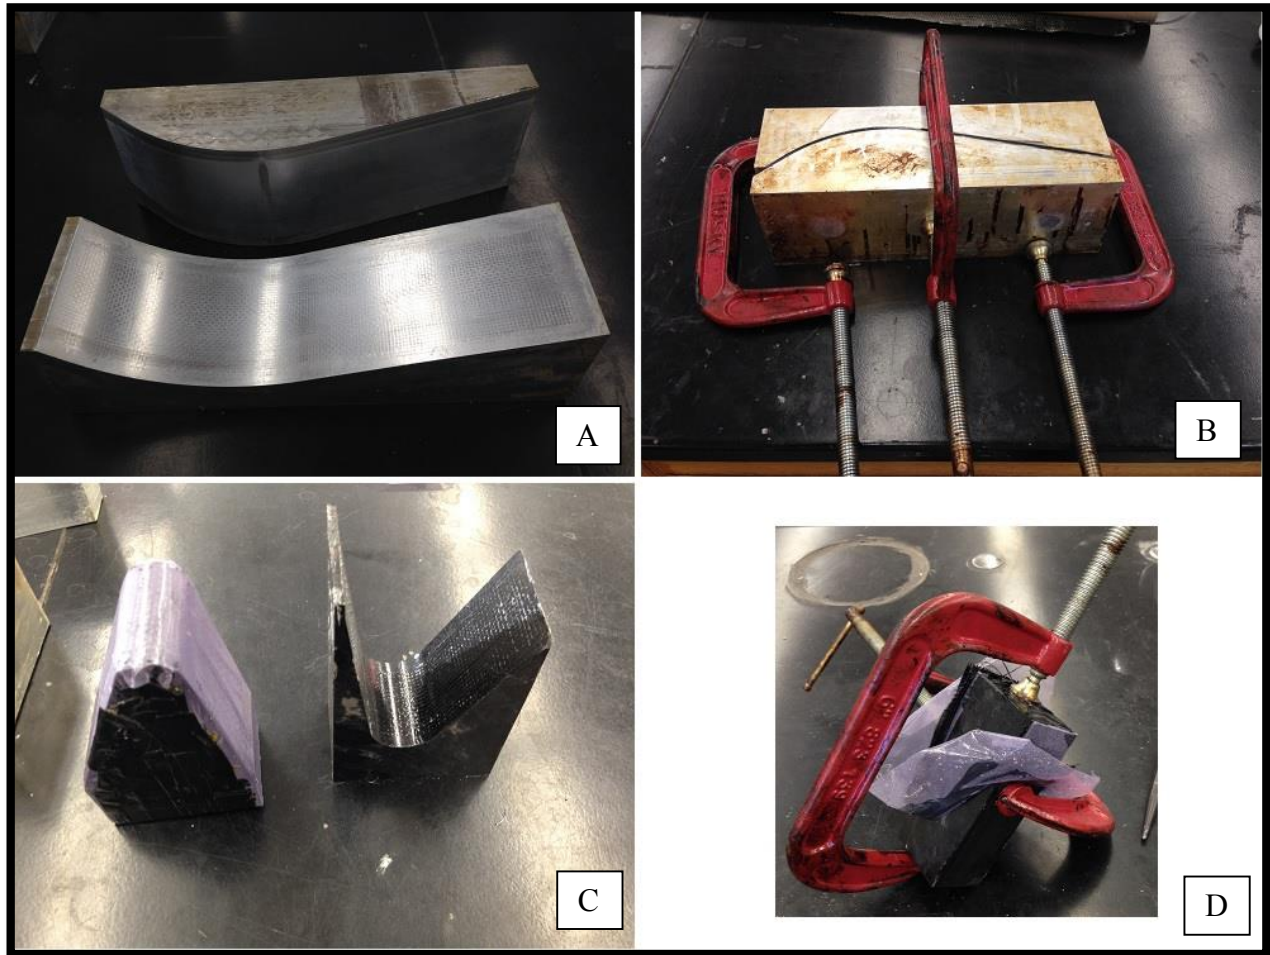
Compression molds used to manufacture the toe and heel layers. (A) Toe molds separated. (B) Toe molds clamped together during curing. (C) Heel molds separated. (D) Heel molds clamped for curing.
